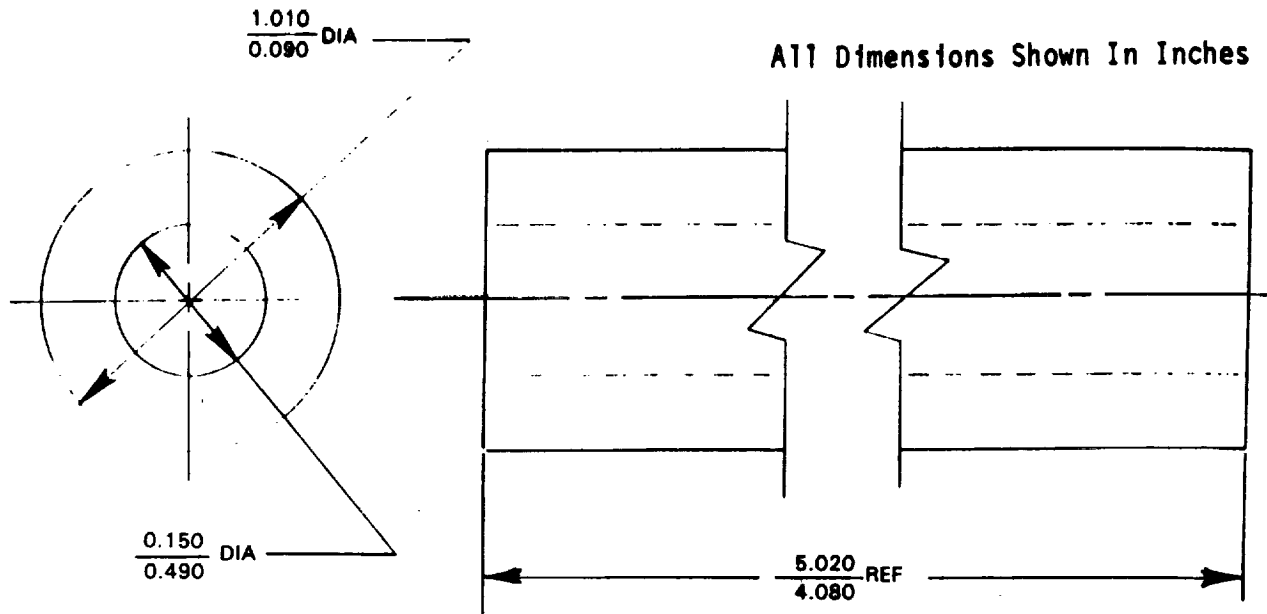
Single Rotating, Internally-Cooled Tube Tests Specimen Geometry
